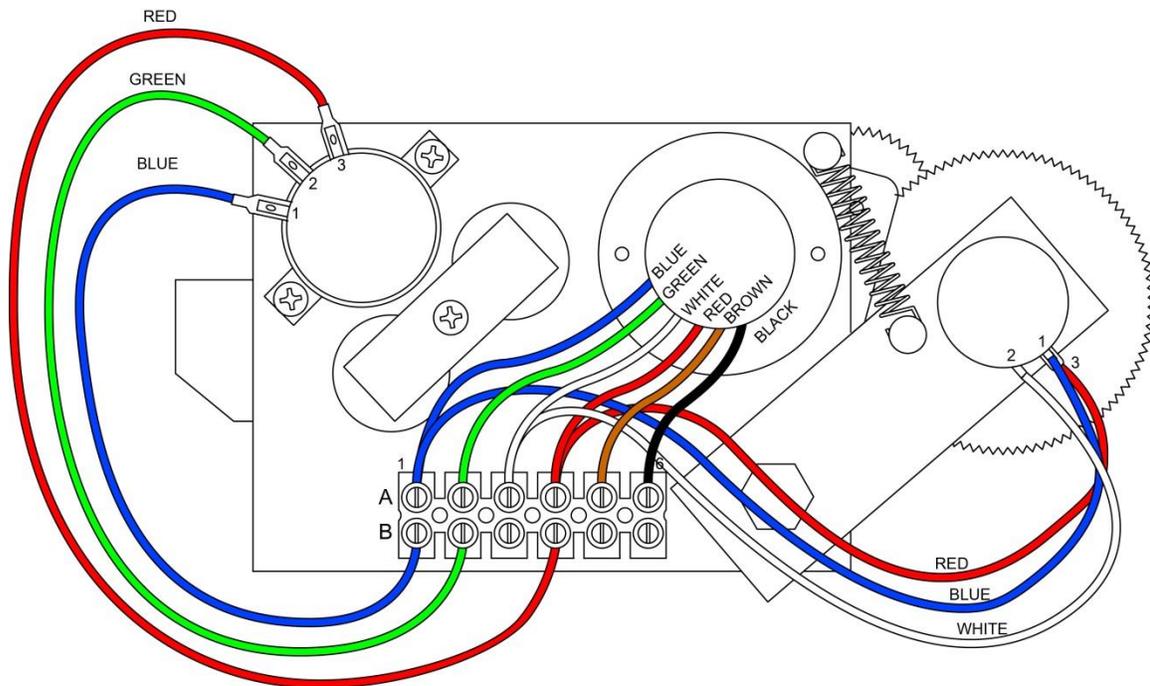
SENSOR BASEPLATE ASSEMBLY WIRING
